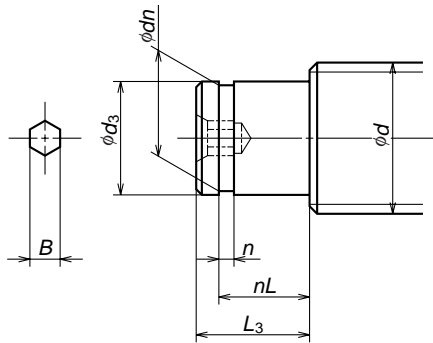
Shaft end configuration of rolled ball screw (opposite to the drive side)
